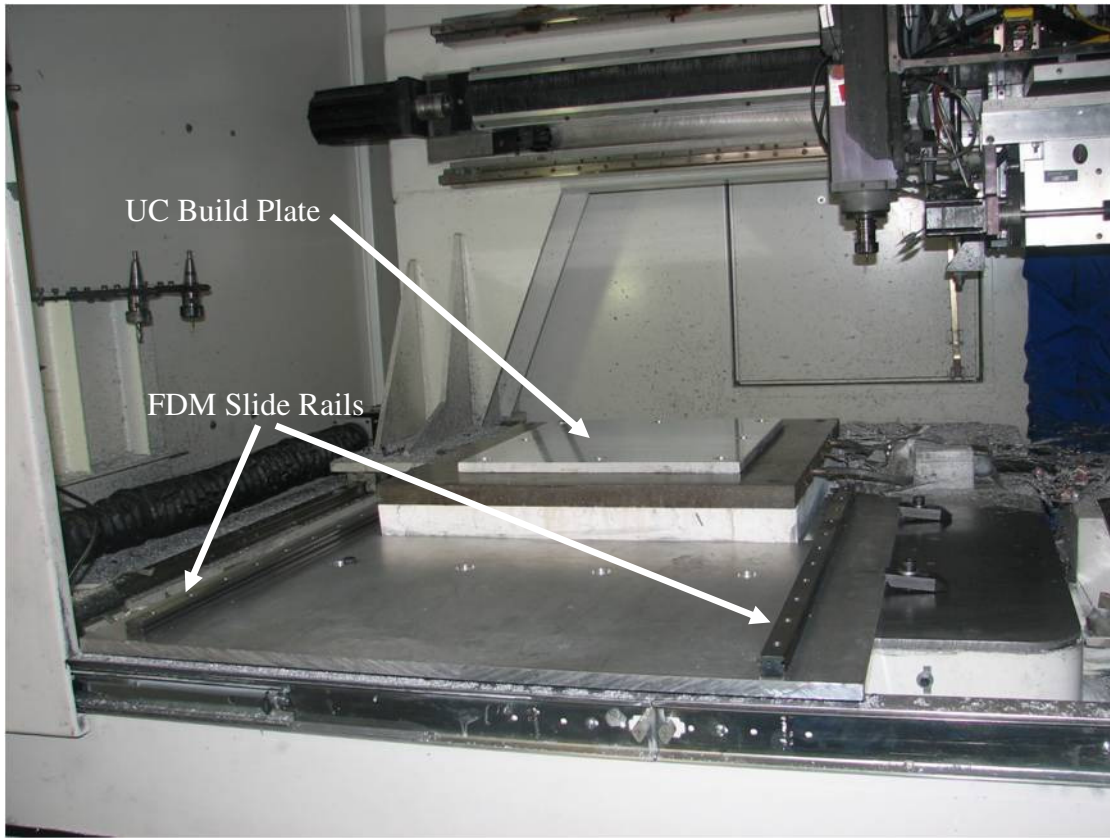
Inside UC build chamber showing FDM guide plate setup.
